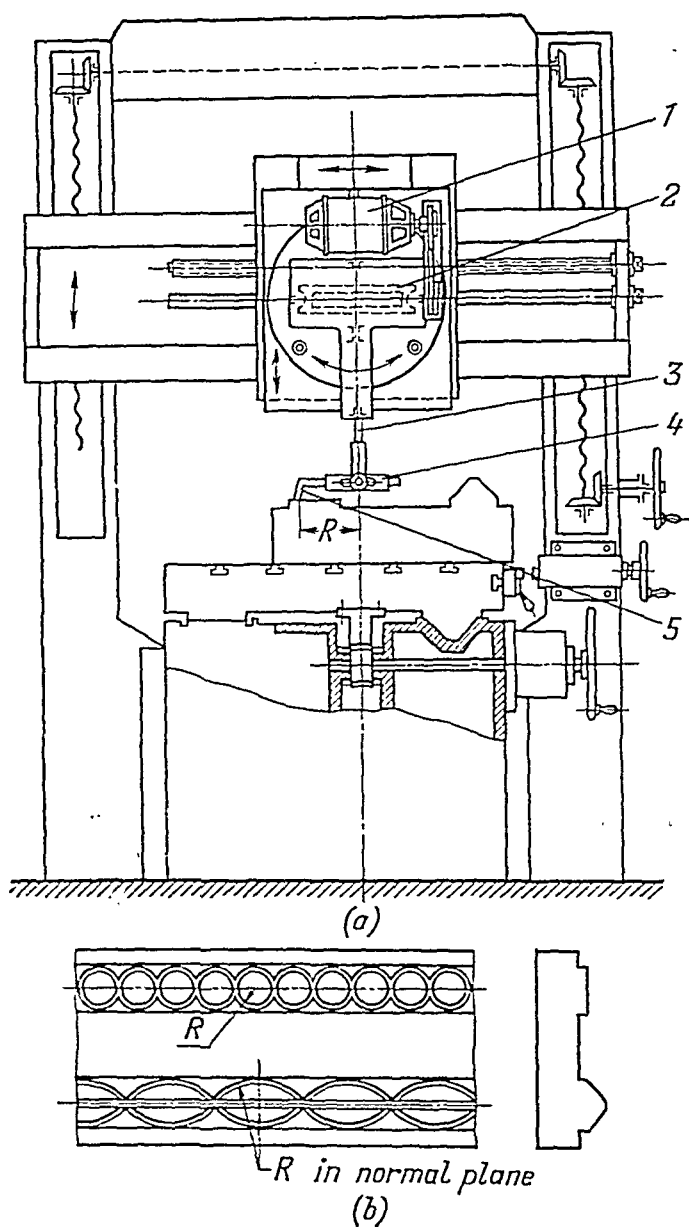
Cutting oil grooves on the ways of machine tools:
